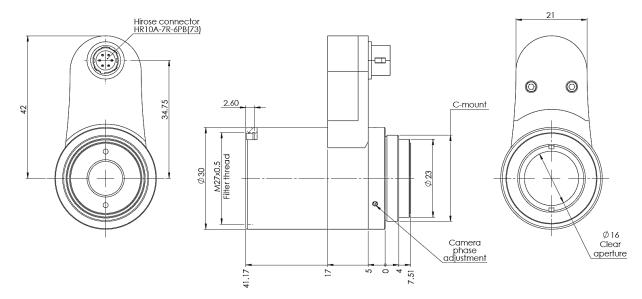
Mechanical drawing of the ELM-16-5.6-11-C
